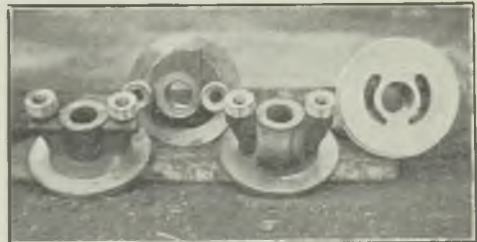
LIGHT CASTINGS WHICH ARE CAPABLE OF CAUSING TROUBLE IN THE FOUNDRY.
